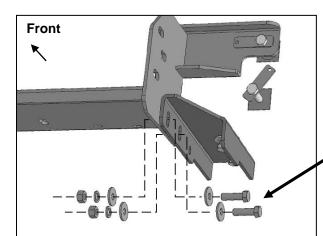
Attach factory bumper with inner Winch Tray Bracket Assembly to end of frame
